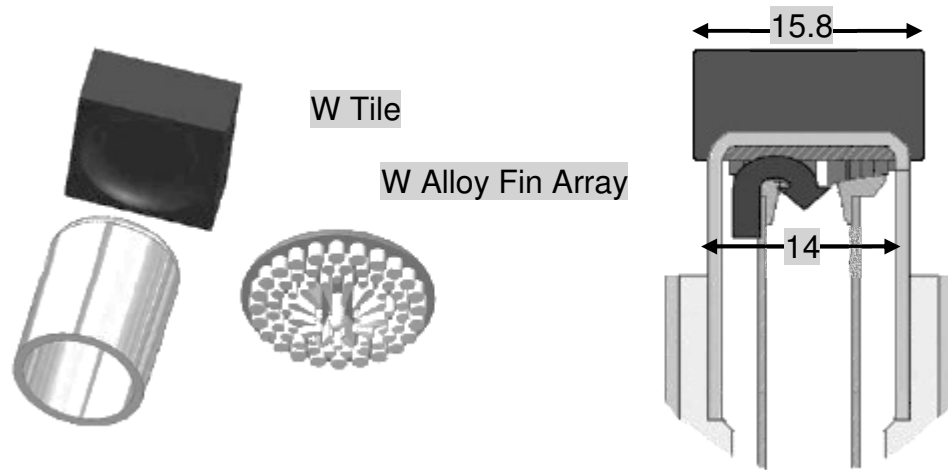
The HEMP divertor. Exploded view with fin array (left) and cross section of assembled module (right). Dimensions in mm. [24]
